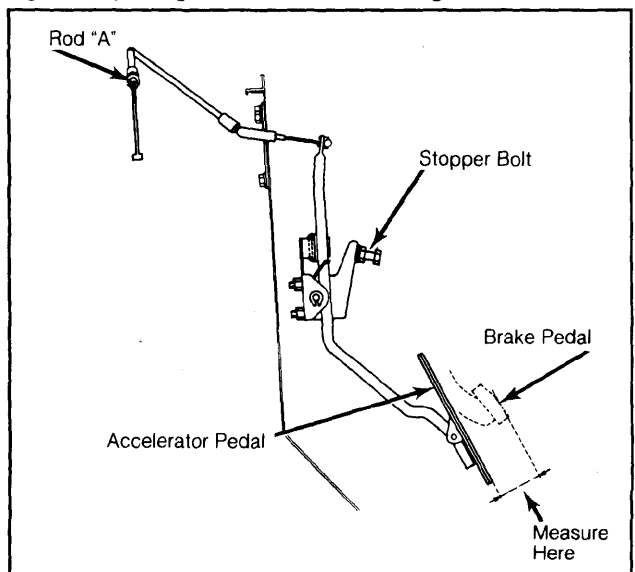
Adjusting Secondary Throttle Valve Opening Clearance
